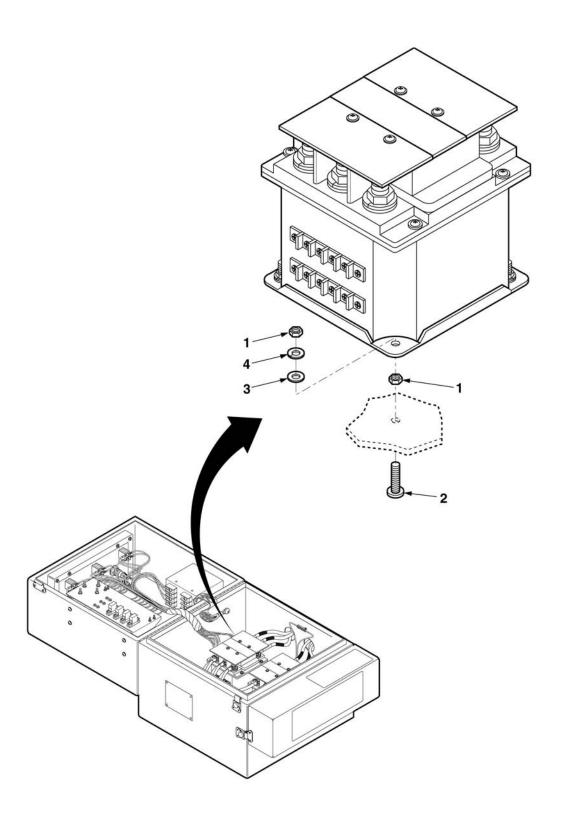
Contactor, Magnetic 7E656 JCG-6026
